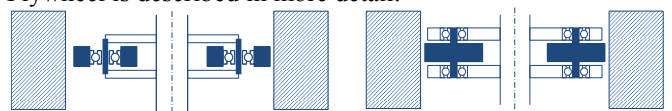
Left: Roller elements mounted on the outer bearing race; right: RRD mounted inbetween a set of two ball bearings.
